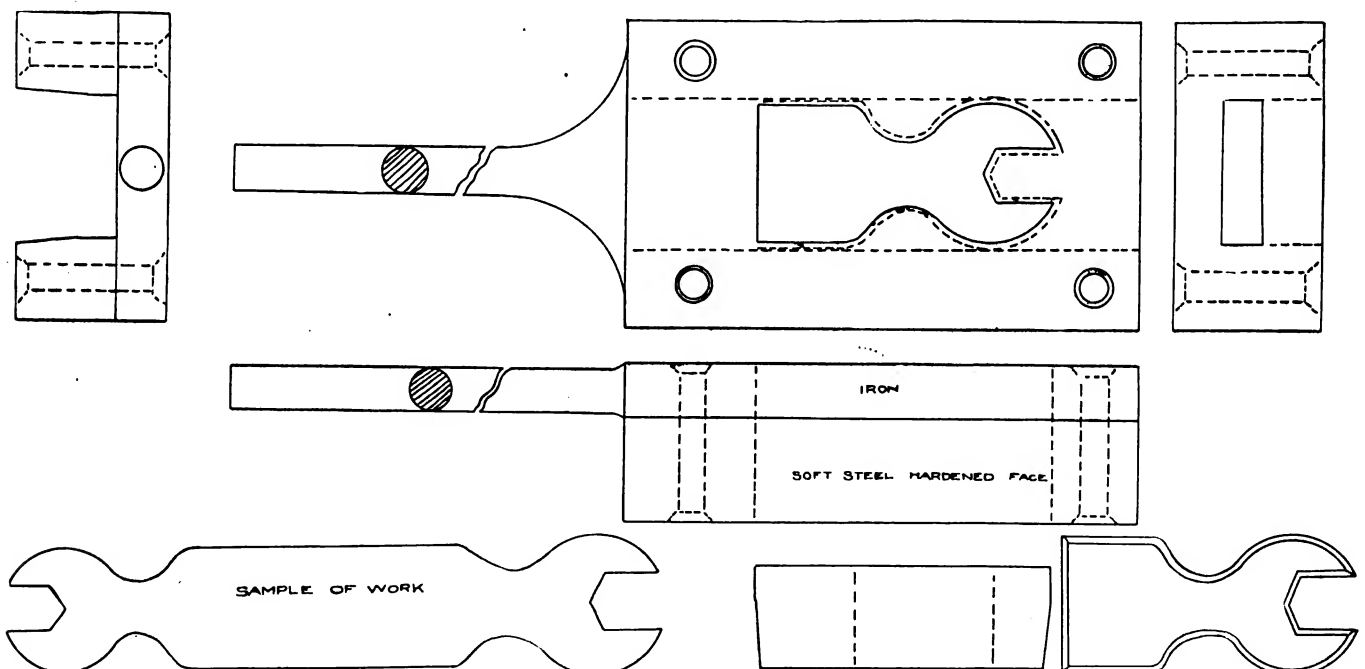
SHOWING A HANDY TOOL FOR PUNCHING OUT WRENCHES UNDER A STEAM HAMMER.
